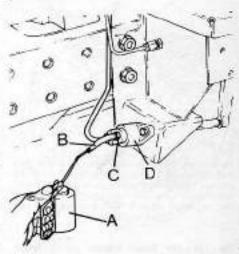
Use pressure oil can (A) connected to air screw (C) of slave cylinder (D) by flexible tube (B) to bleed air from clutch hydraulic system.
